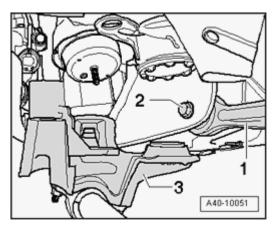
Pulling Engine Mount And Stabilizer Bar Console Downward And Removing Bolts & Control Link
